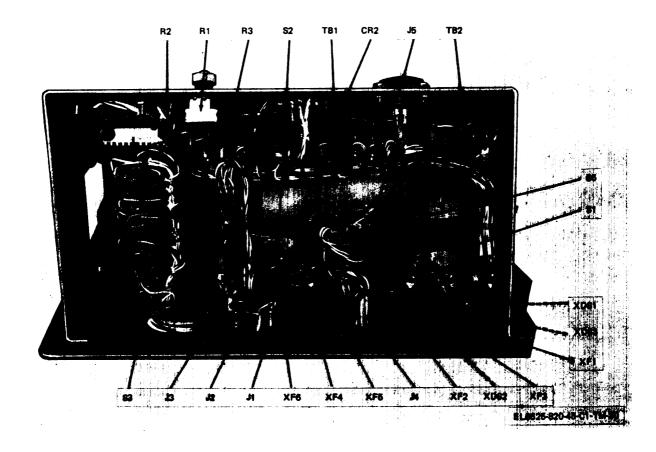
Bottom view of Test Set, Radio TS-2500A/ARM-92, front panel.
